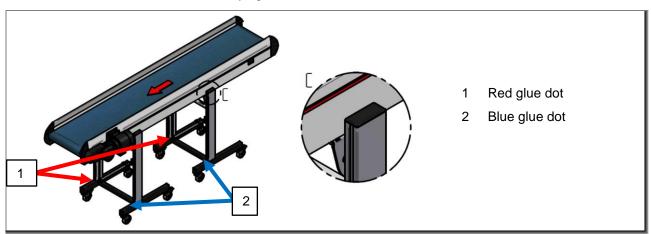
Overall construction assembly conveyor with support HE 030 – HM 260 (typical)
